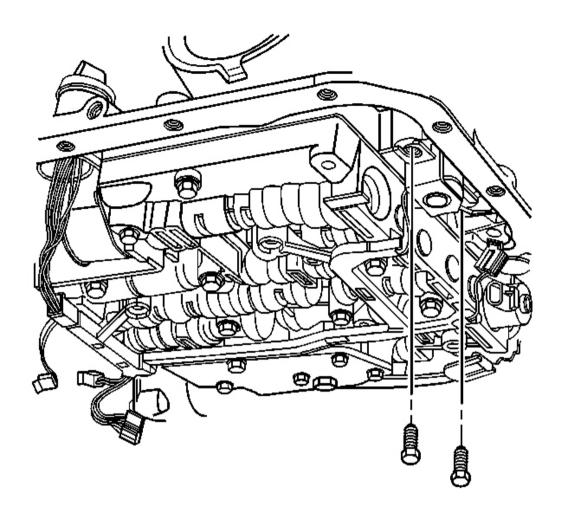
Identifying TCC Solenoid & Bolts Courtesy of GENERAL MOTORS CORP.
